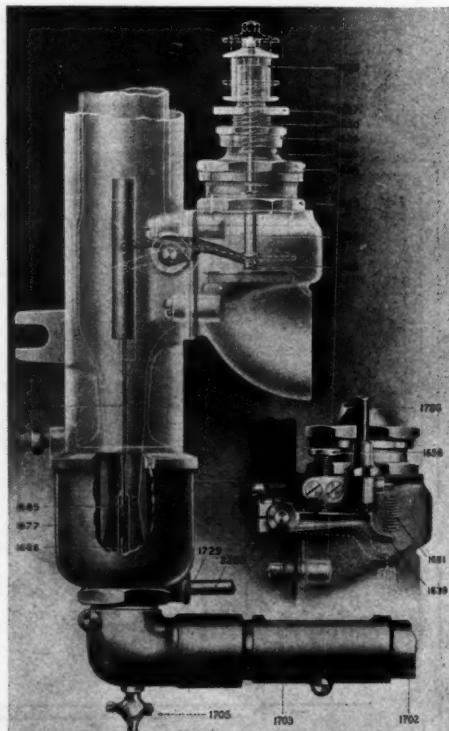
Cutaway view of the model Stevens Duryea carbureter
